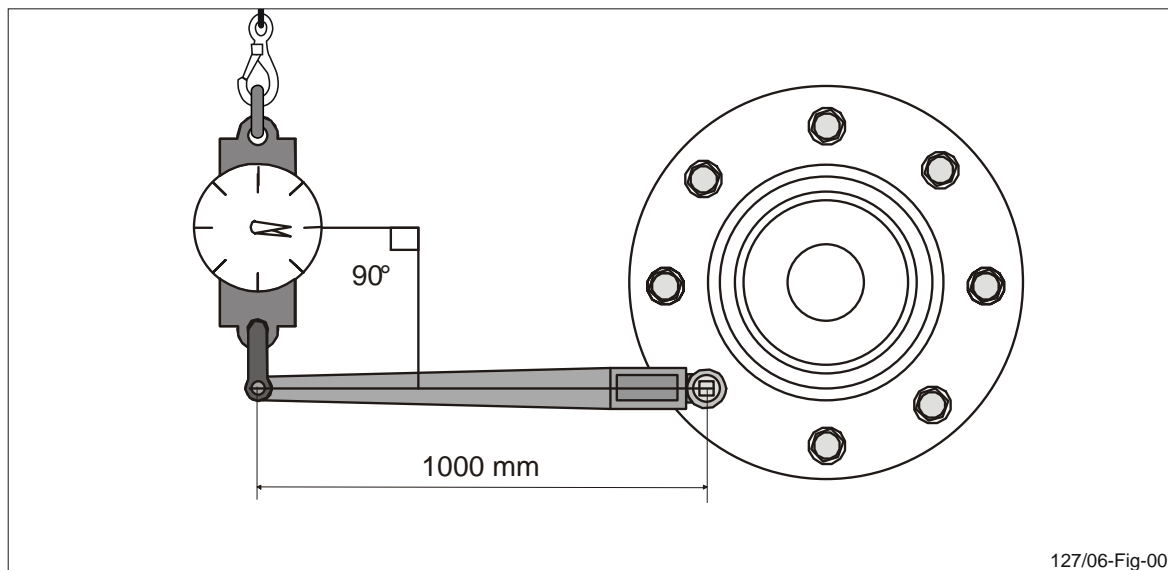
Alternative 1: Dynamometer and torque wrench attached to a shaft flange screw.
